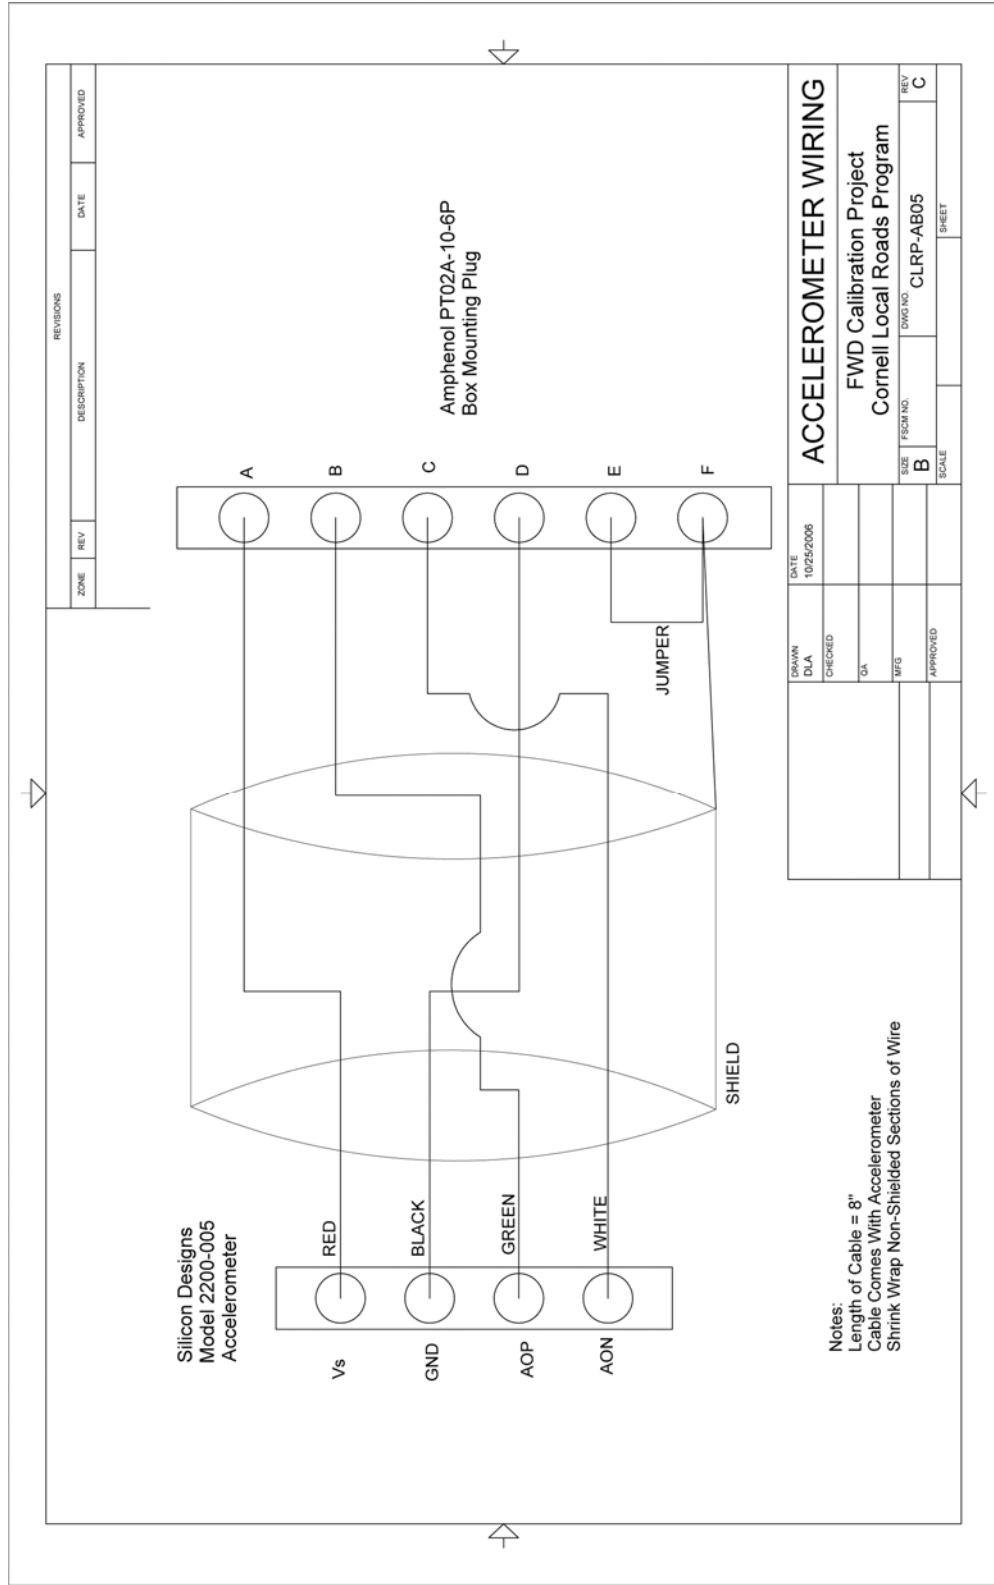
Drawing. CLRP-AB05 Accelerometer Wiring.
